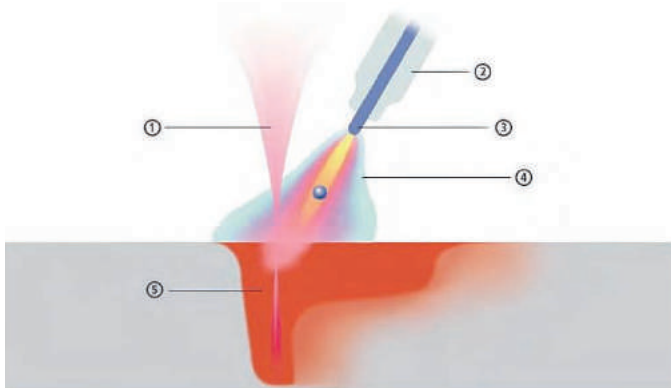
Laser hybrid welding process. 1: Laser beam, 2: Gas nozzle, 3: Electrode, 4: Pulsed arc, 5: Penetration (courtesy of Trumpf).
